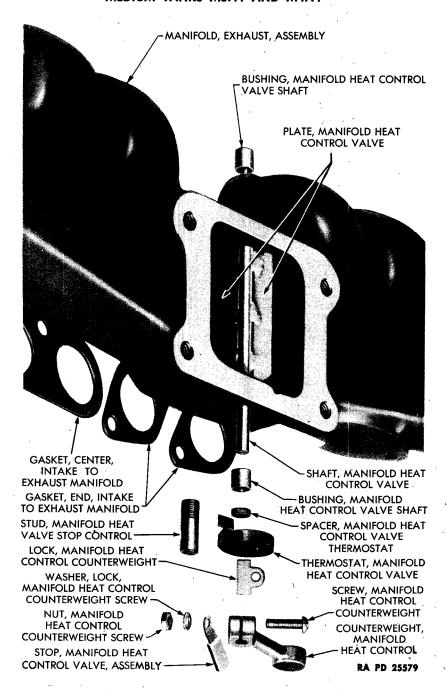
Manifold Automatic Heat Control Valve, Exploded
